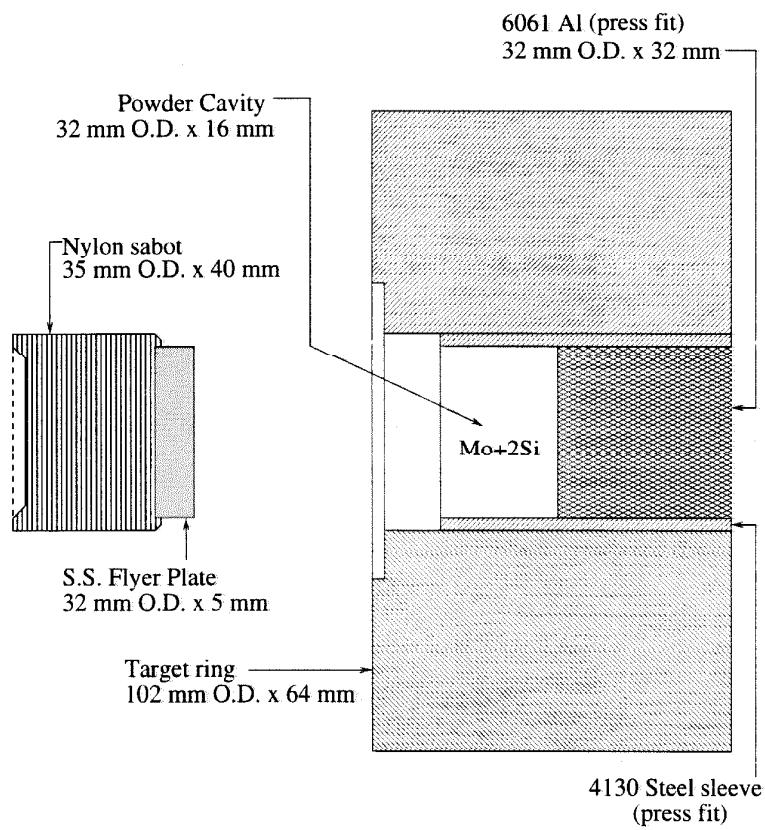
Schematic drawing of the sabot with flyer plate and target design.
